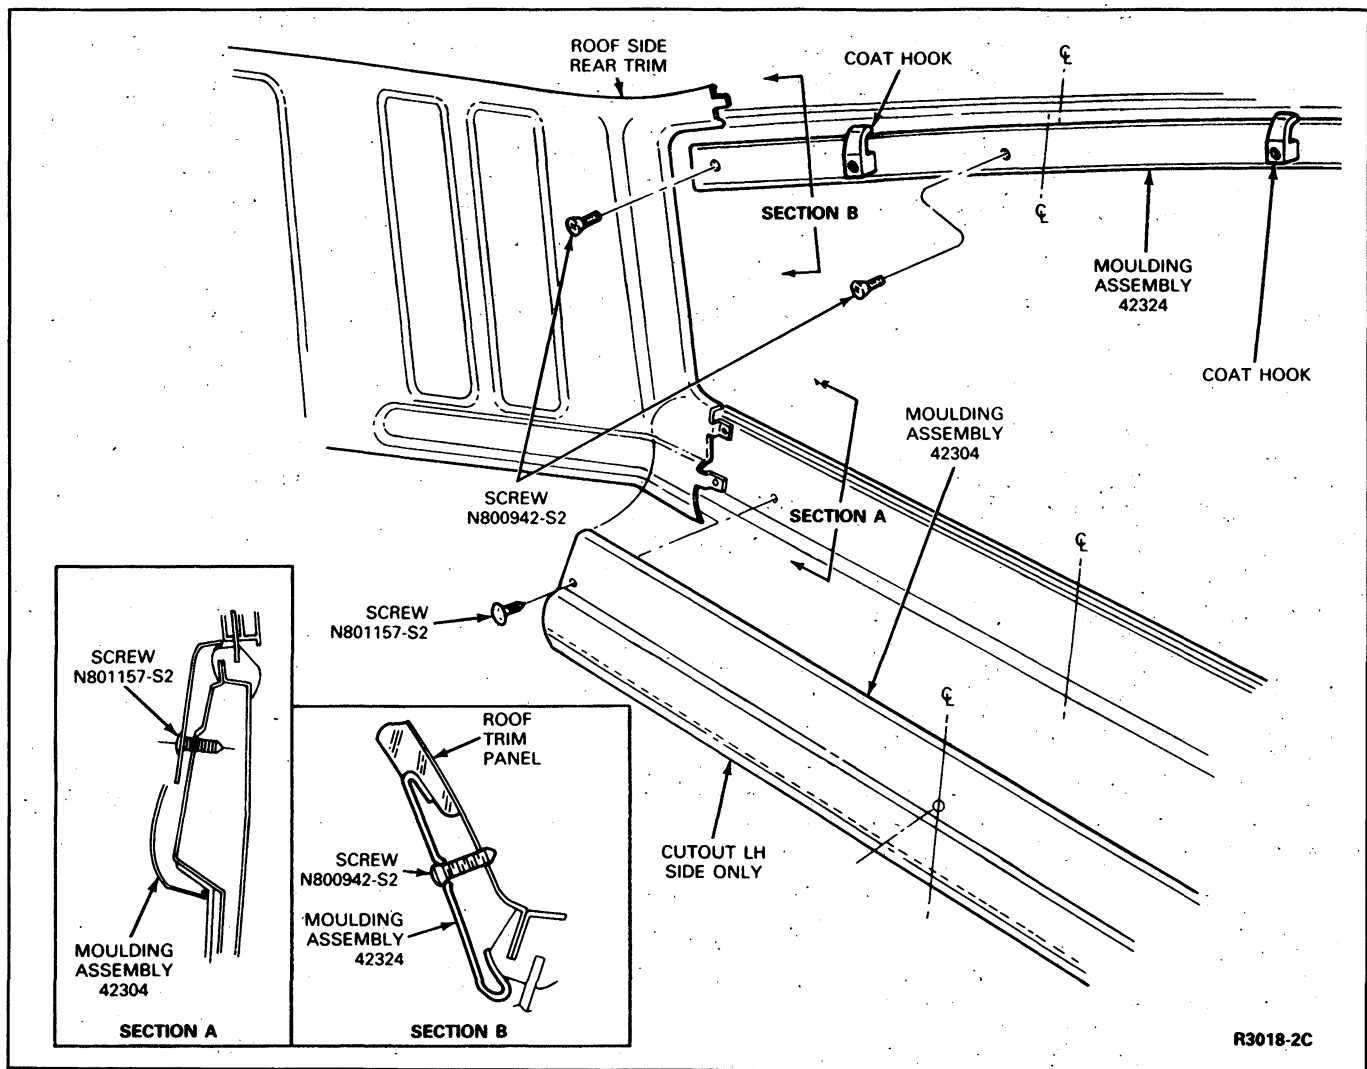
Back Window Garnish Moulding—Super Cab—F-150—F-350
